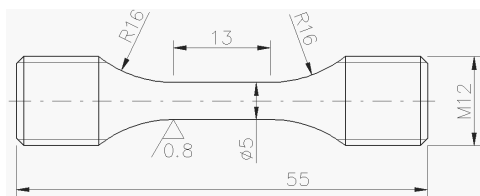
Testing specimen for test of low-cycle fatigue [2]
